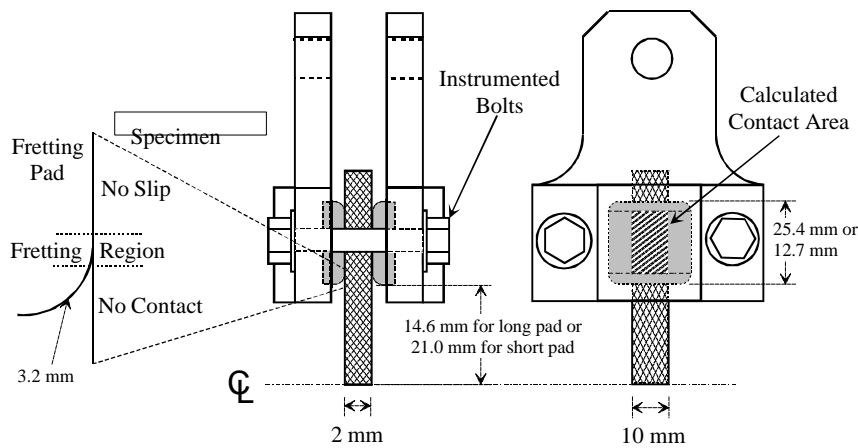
Test fixture schematic indicating pad lengths, distance from center of specimen to lower edge of pad, and blending radius at edge of contact.
